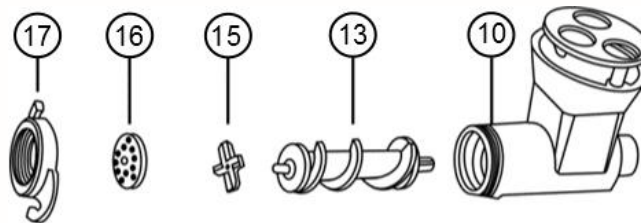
EXPLODED VIEW OF GRINDING UNIT
